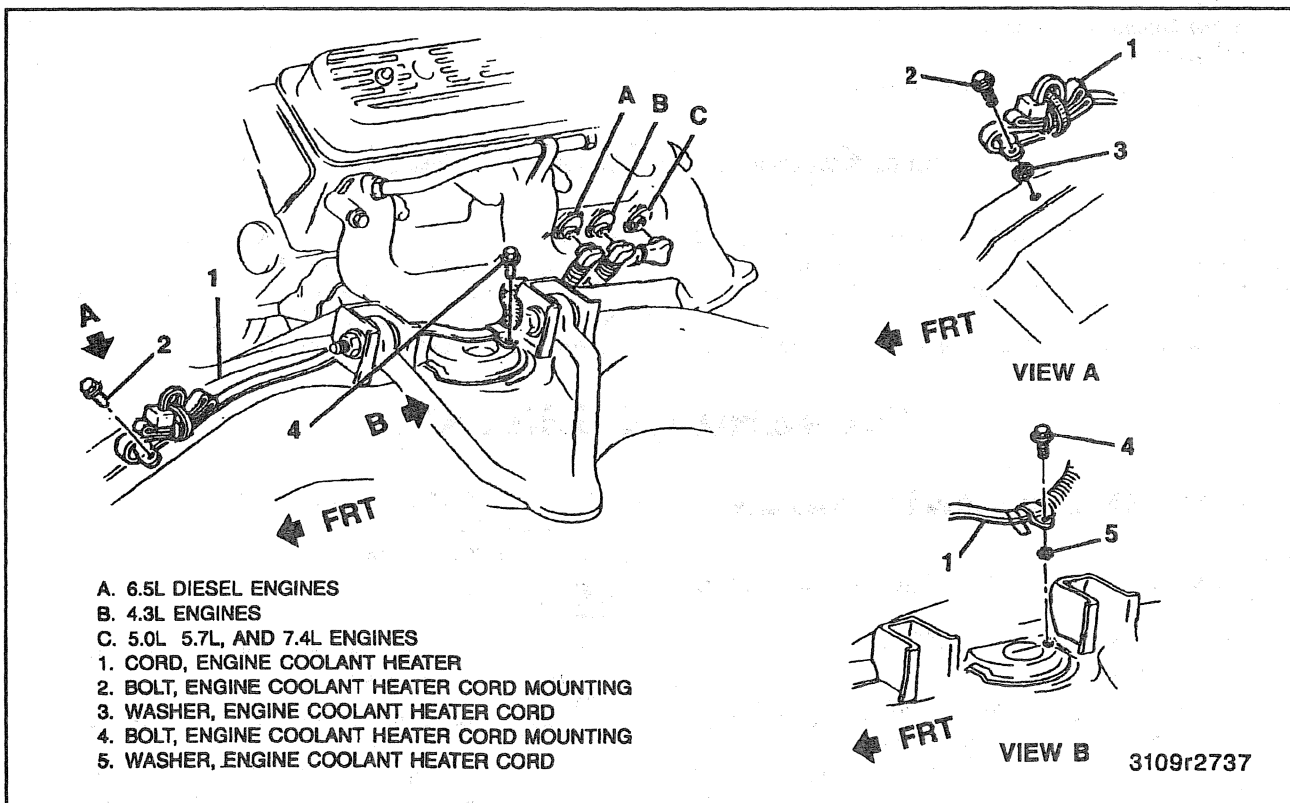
Engine Coolant Heater Cord Routing (Two-Wheel Drive Models)
